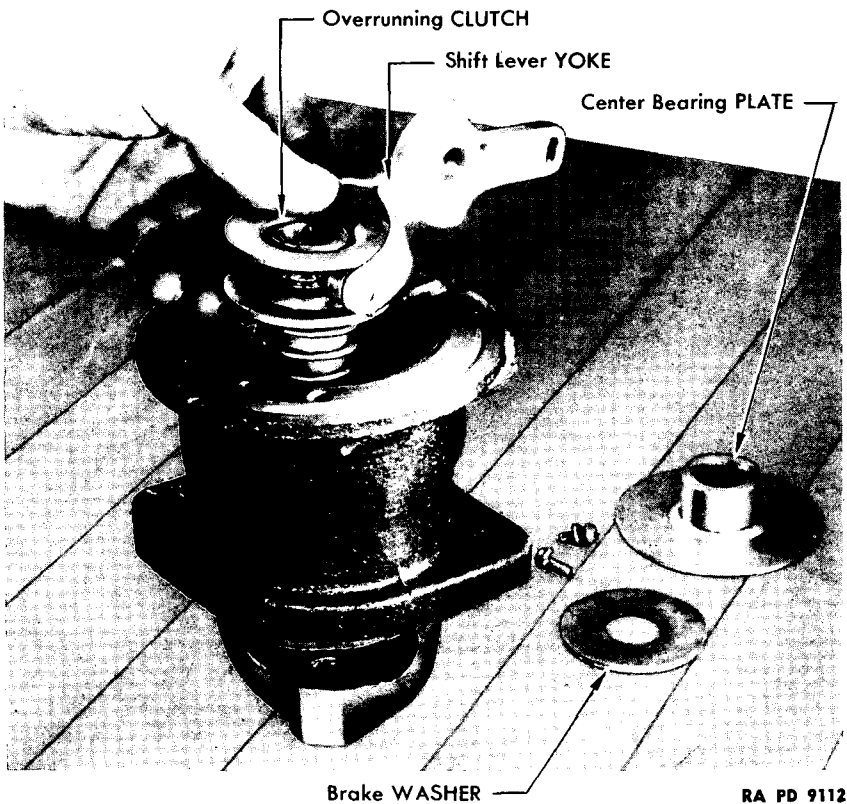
Installing Shift Lever Spring Retainer Assembly
